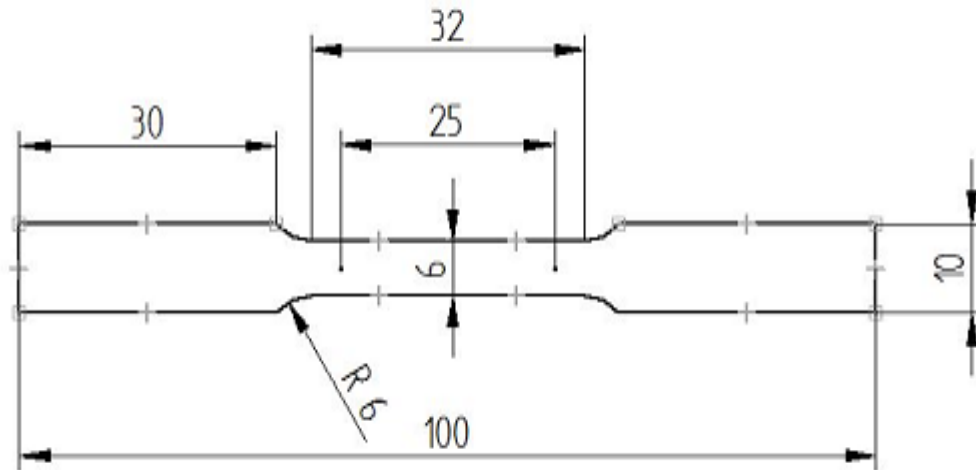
1 ASTM E8/E8M-13 tensile test specimens with dimensions
